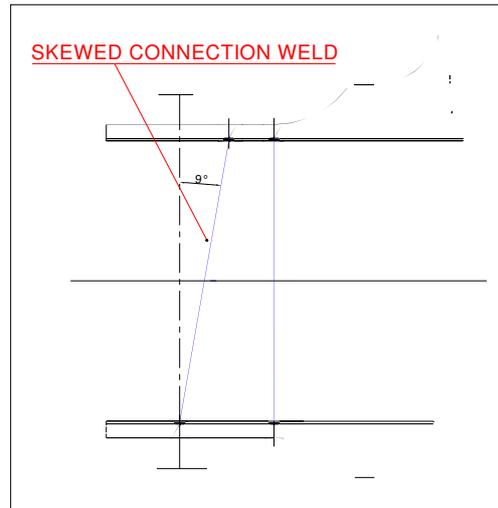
Skewed weld in a nozzle to pipe connection
